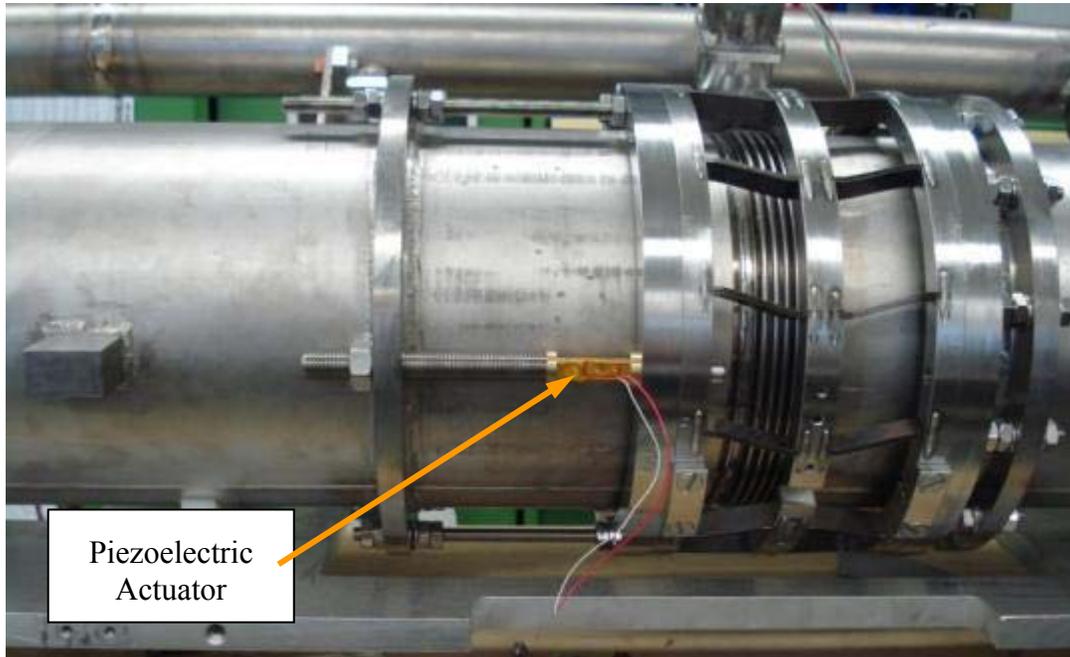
shows the different parts of the blade tuner assembly. The tuner rings (part numbers 844675 and 844685) are welded to the titanium helium vessel.
